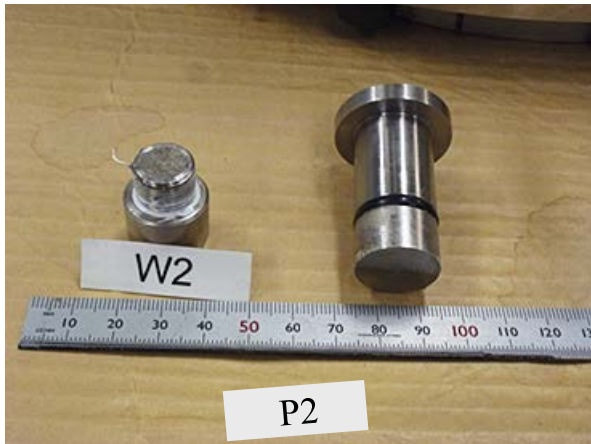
Photo of the casing used for the W2-thermocouple psychrometer and one of the pistons used for stress measurement P1 and P2.
